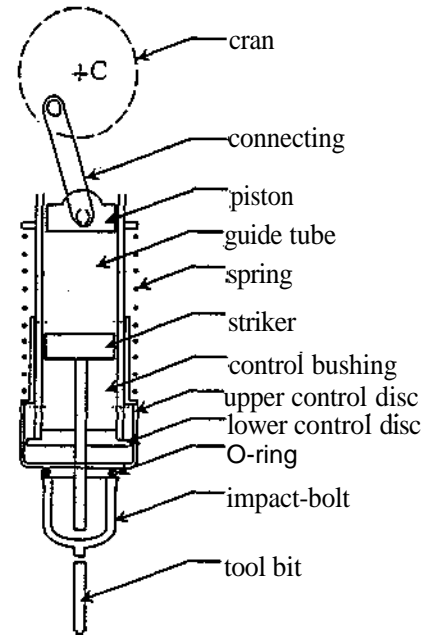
A schematic representation of a hand-held chipping hammer assembly.
